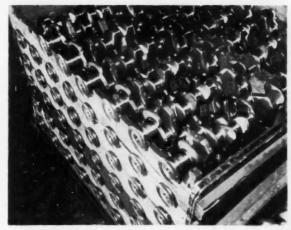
Crankshafts coated with a light oil-type slushing compound are stacked in dry wood racks for storage in a temporary bank
